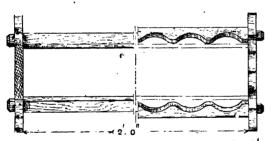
Part Plan and Part Section of Umbrella Stand.
